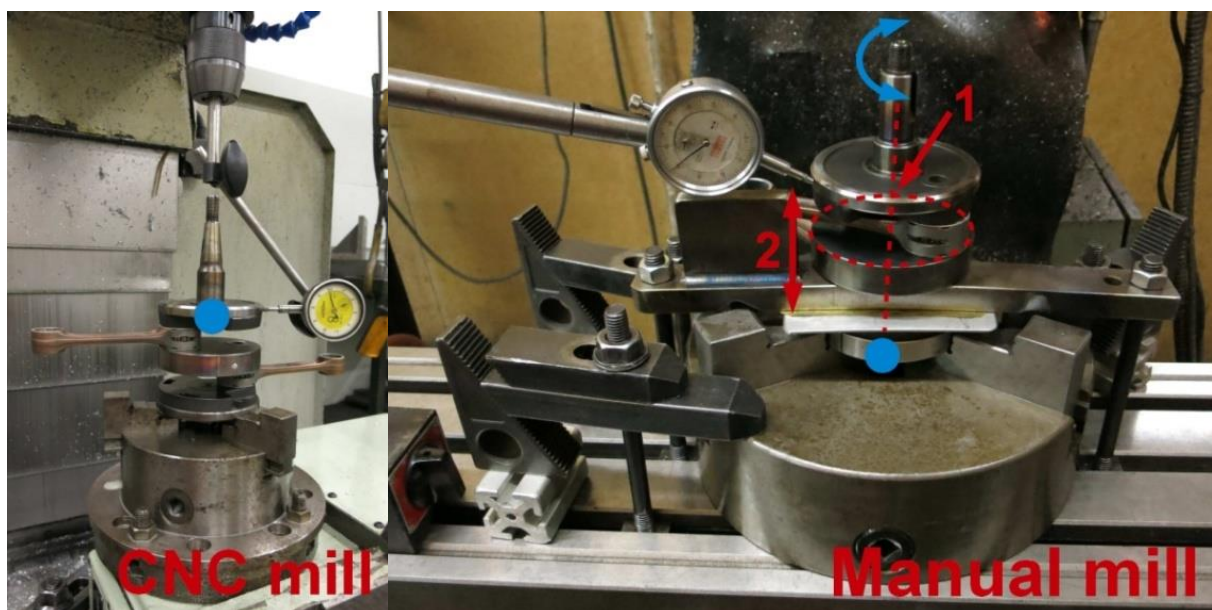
THE CRANKSHAFT CLAMPED IN A THREE-JAW CHUCK ON THE CNC MILL (LEFT) AND MANUAL MILL (RIGHT).
